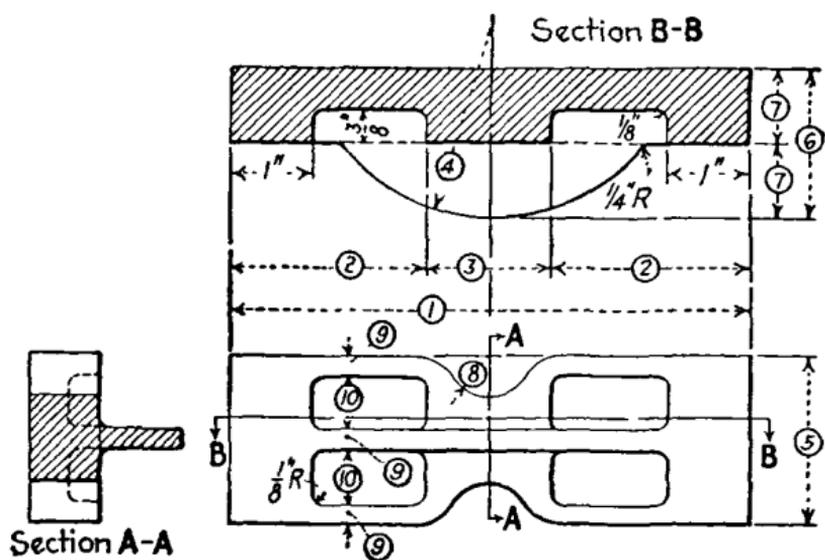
A.E.R.E.A. standard journal thrust plates.
